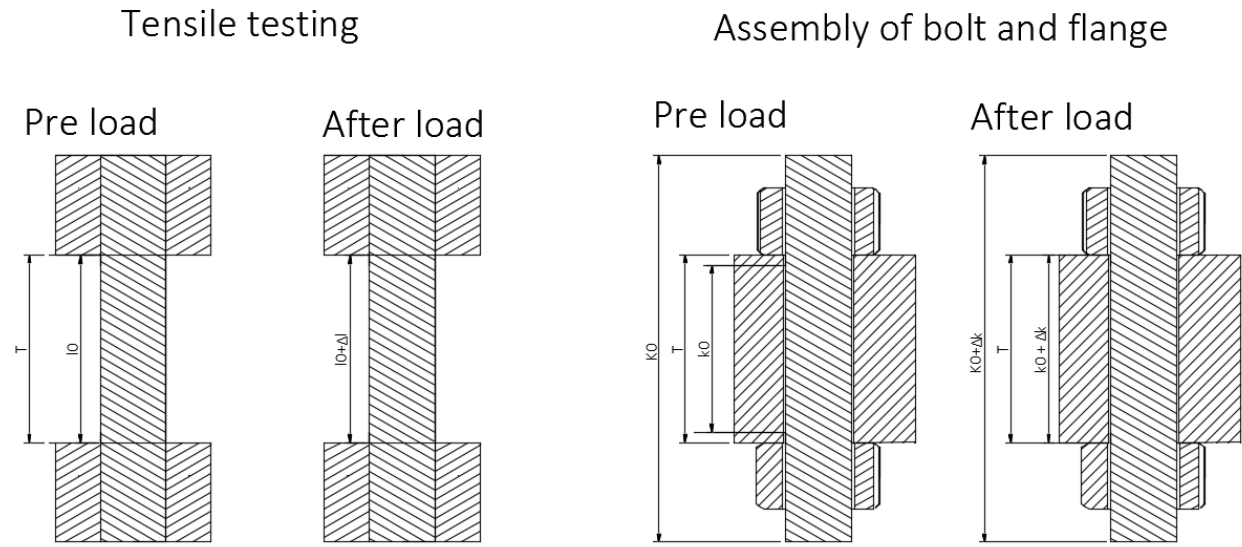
Sketch of tensile testing and assembly of bolt and flange
